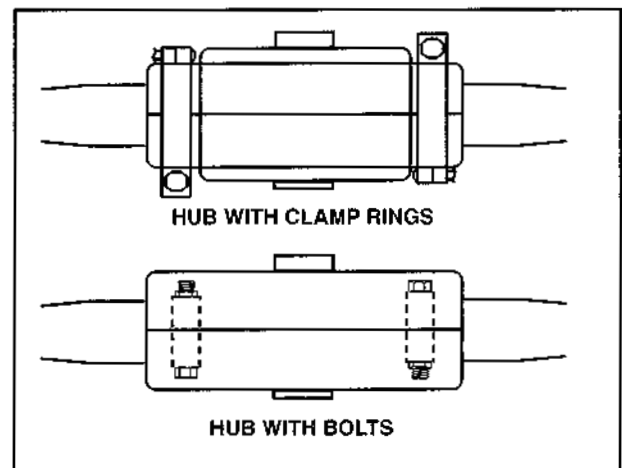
Ground-adjustable propellers use clamp rings or bolts to secure the hub halves and hold the blades in place.
